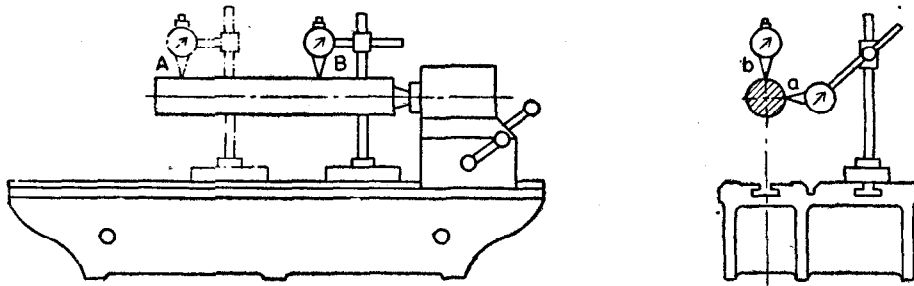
CHECKING OF PARALLELISM OF AXIS OF CENTRE WITH BASE
